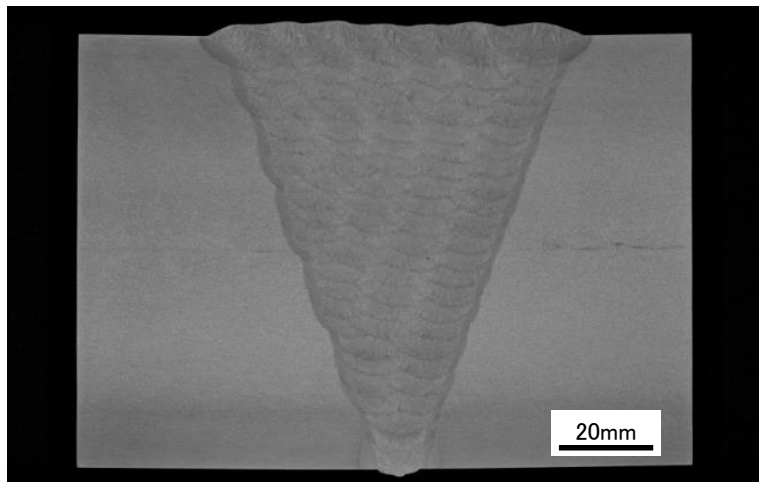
Macrostructure of welded joint (90 mm thickness)³⁾.
